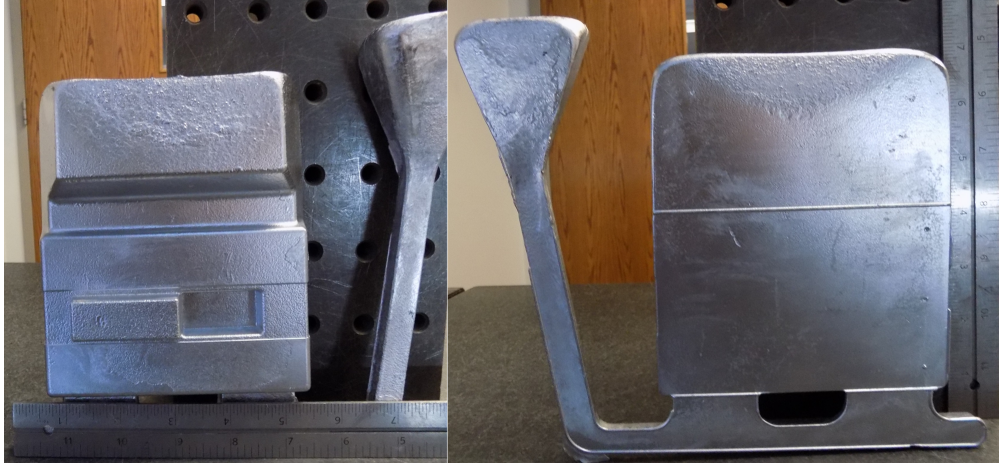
Linamar Mold: (Left) Complex Geometry Side of Casting (Right) Flat Geometry Side of Casting.
